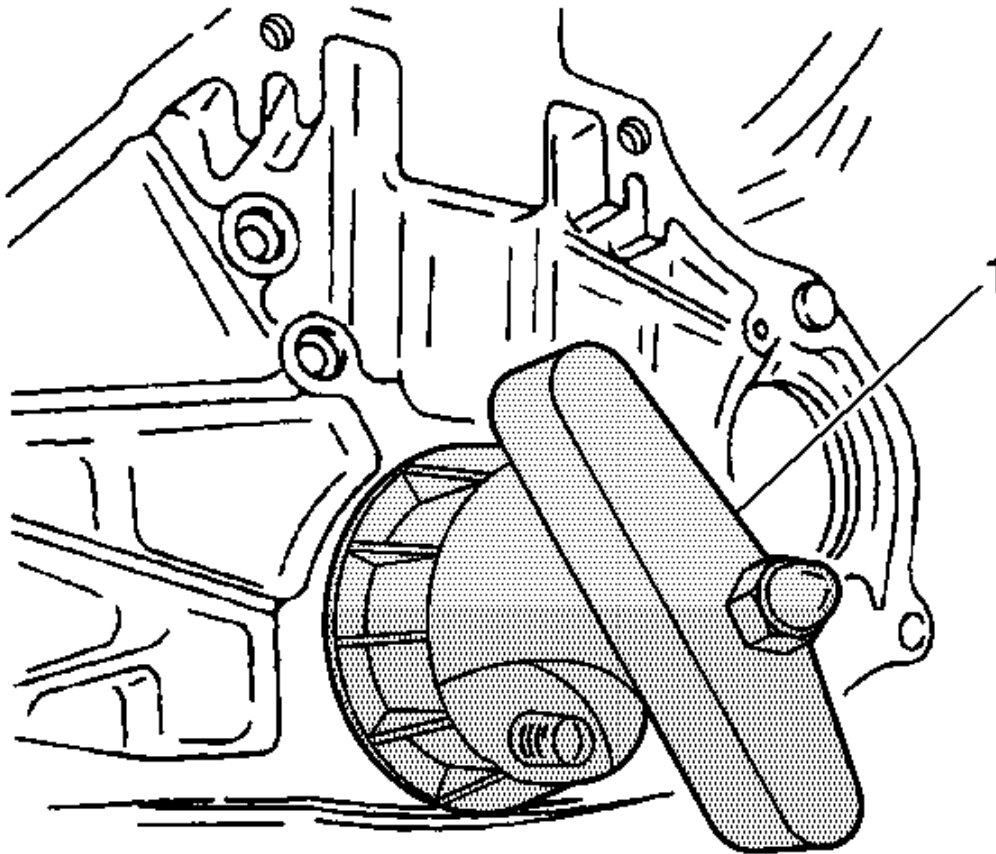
View Of Crankshaft Rear Oil Seal Special Tool
